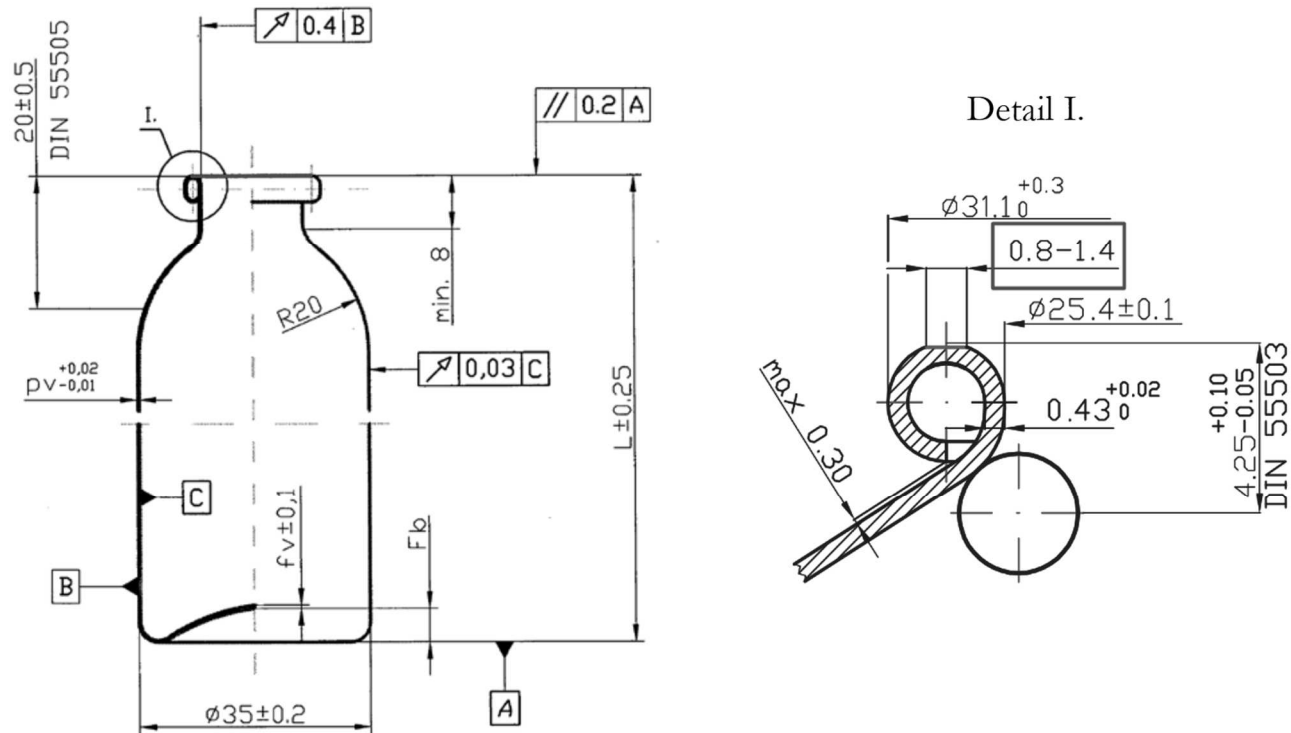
Turning the flange of the can by forming a flat surface perpendicular to the can axis
